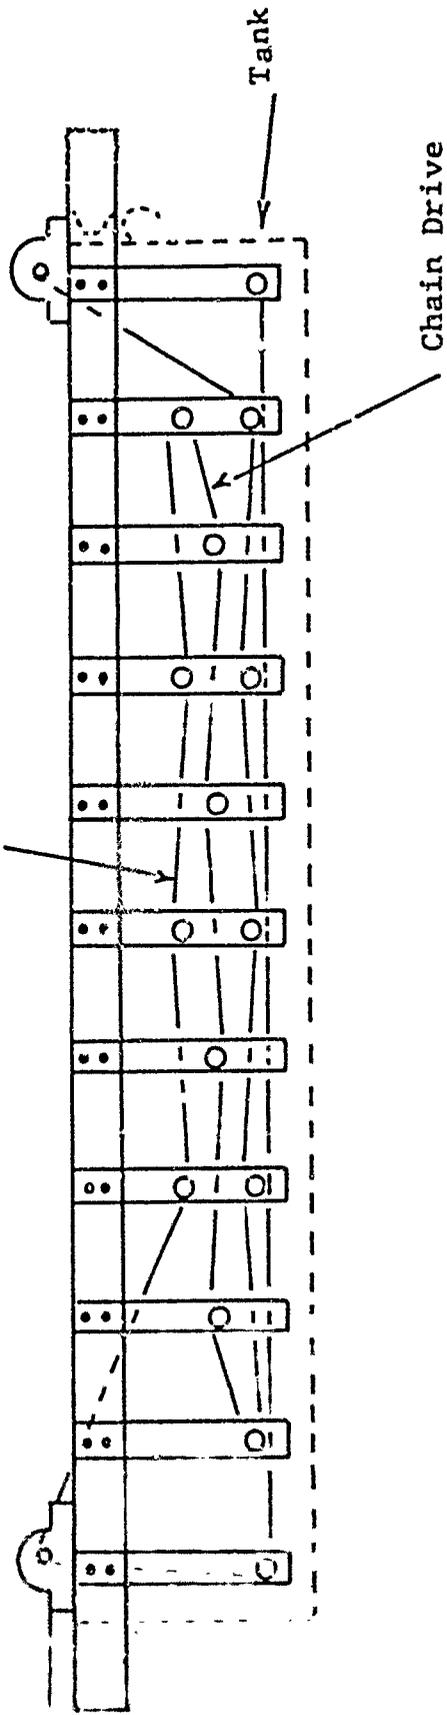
Festooning Fixture for Tank 1 and 3.
